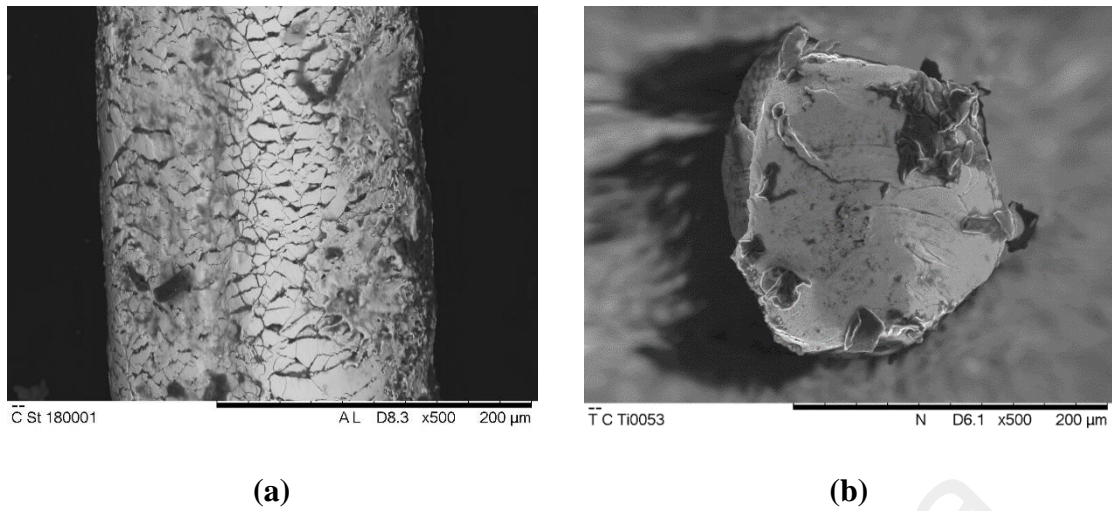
SEM sample of wire rupture (a) coated wire after machining (b) cross section of the wire after machining
